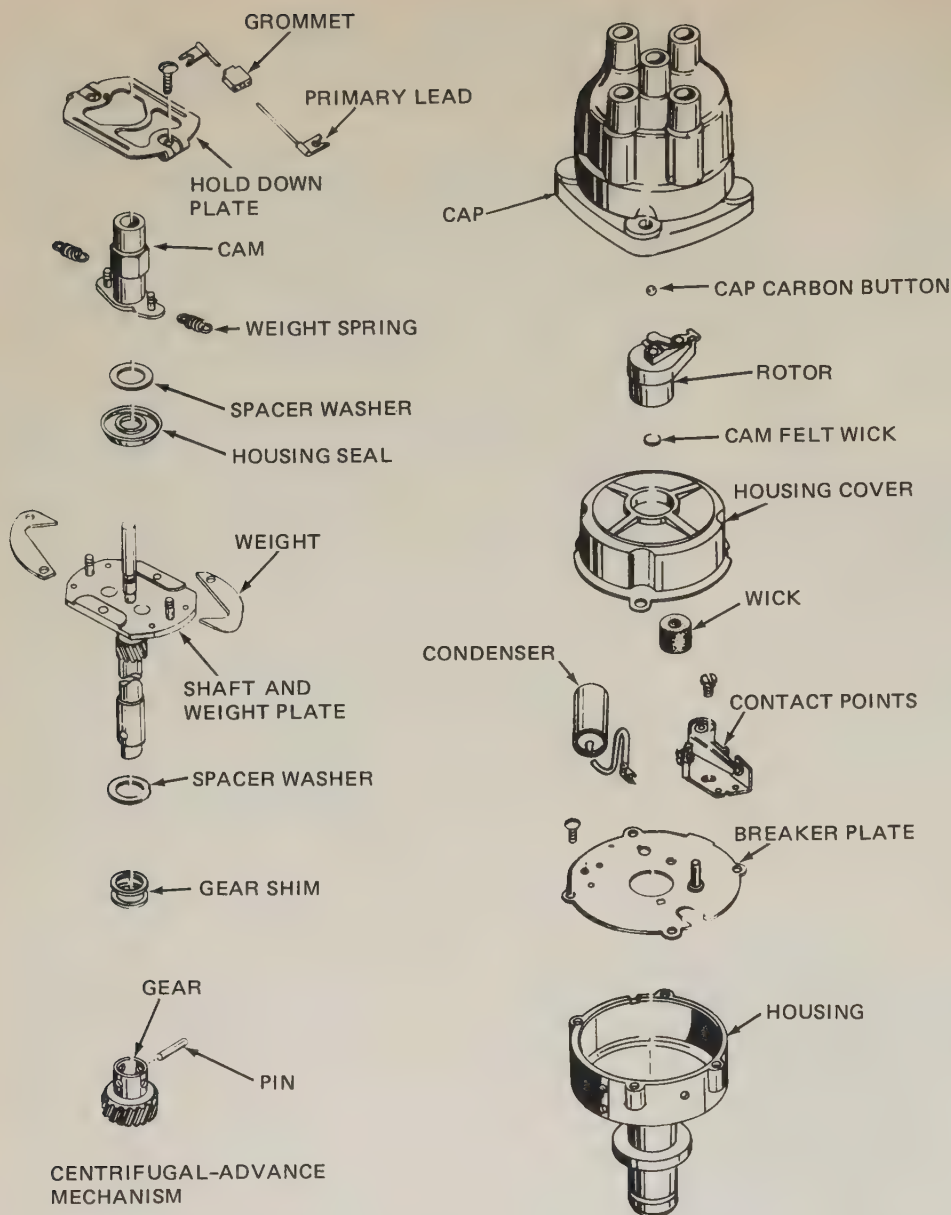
Disassembled view of a small-engine distributor. (Wisconsin Motor Corporation)
